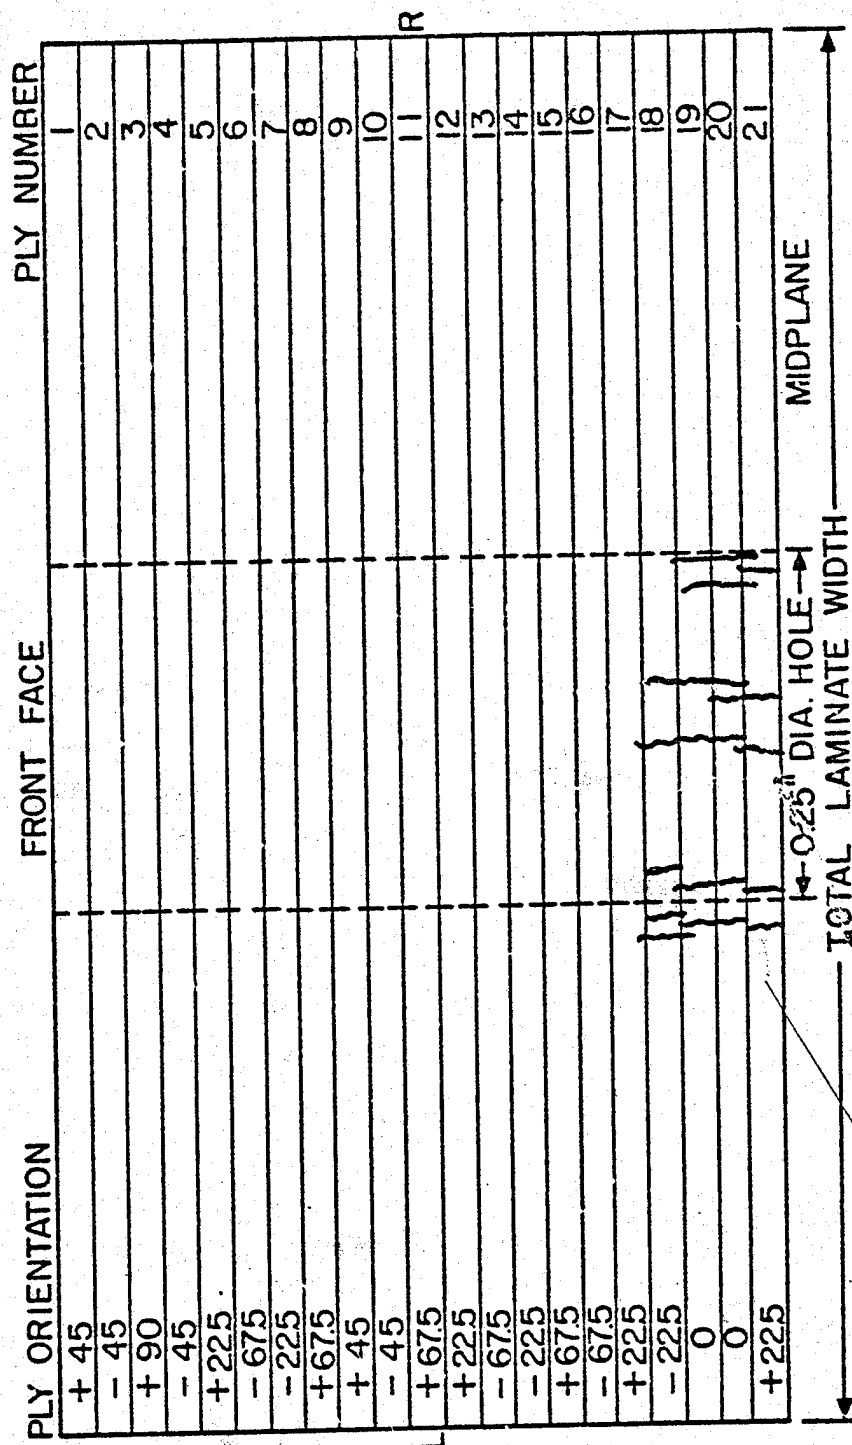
A. The second transverse section of specimen 102 (42 ply) showing damage detail.
